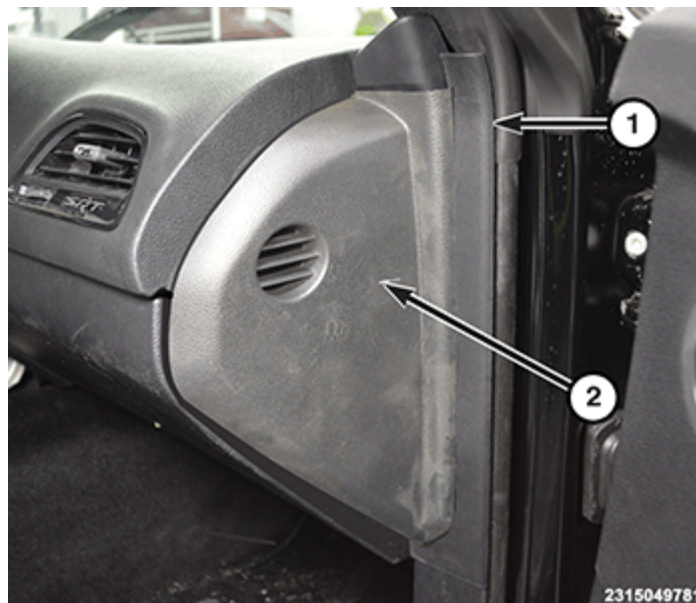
A-Pillar Extension & Instrument Panel End Cap
